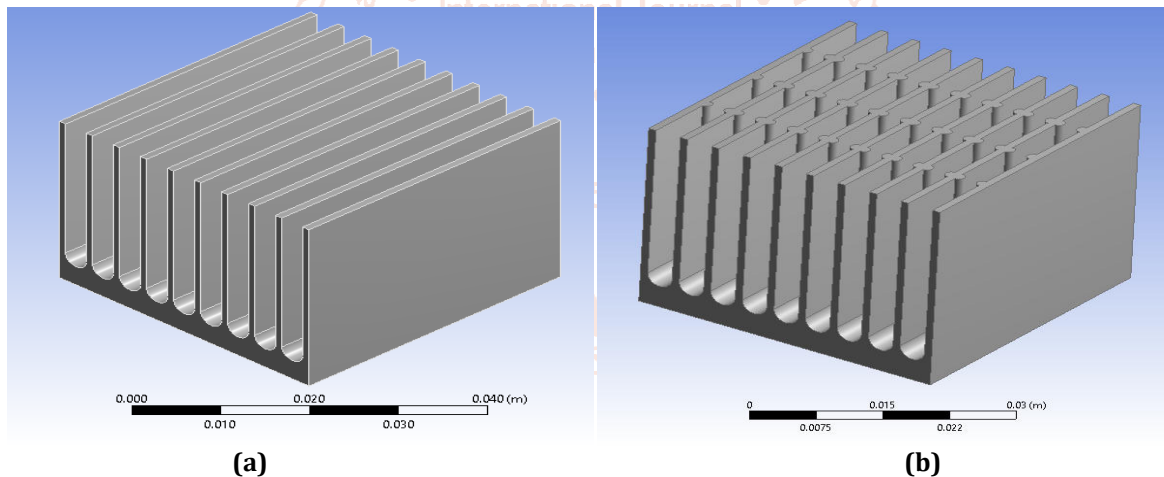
The geometrical model (a) Conventional design and (b) Proposed design
